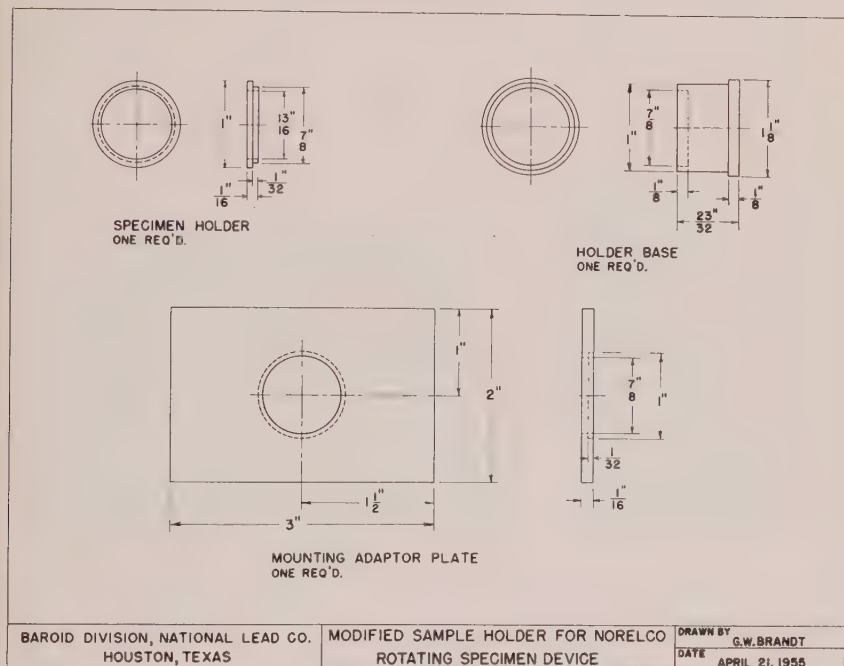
Modified sample holder for Norelco rotating specimen device.
